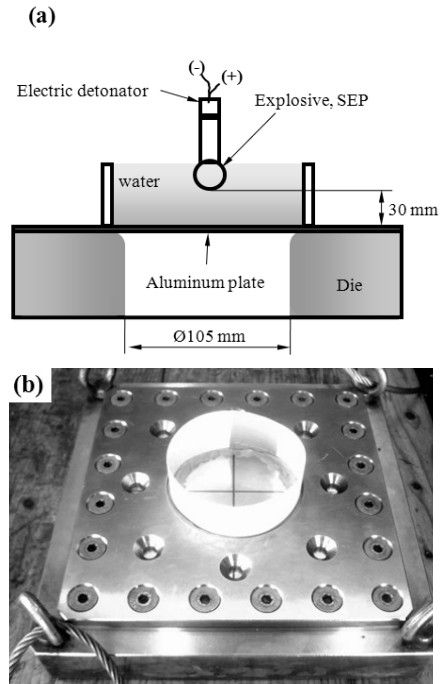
Schematic illustration of (a) explosive forming device of aluminum plate and (b) its real photograph
